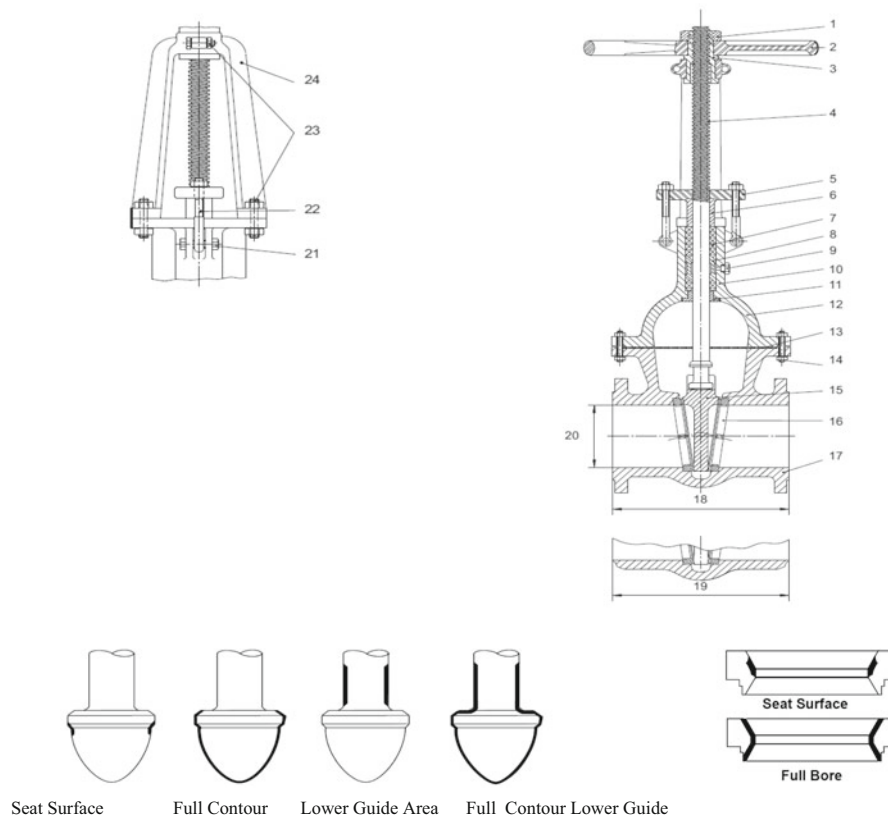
Identification of gate valve terms (Source: API 600). *Keys.* (1) Handwheel nut. (2) Handwheel. (3) Stem nut. (4) Stem. (5) Gland flange. (6) Gland. (7) Stem packing. (8) Lantern ring. (9) Plug. (10) Wiper packing. (11) Backseat bushing. (12) Bonnet. (13) Bonnet gasket. (14) Bonnet bolts and nuts. (15) Gate. (16) Seat ring. (17) Body. (18) Raised face. (19) Butt-welding end. (20) Valve port. (21) Gland lug bolts and nuts. (22) Gland bolts or gland eyebolts and nuts. (23) Yoke bolting. (24) Yoke. Note-Critical leakage parts are underlined
